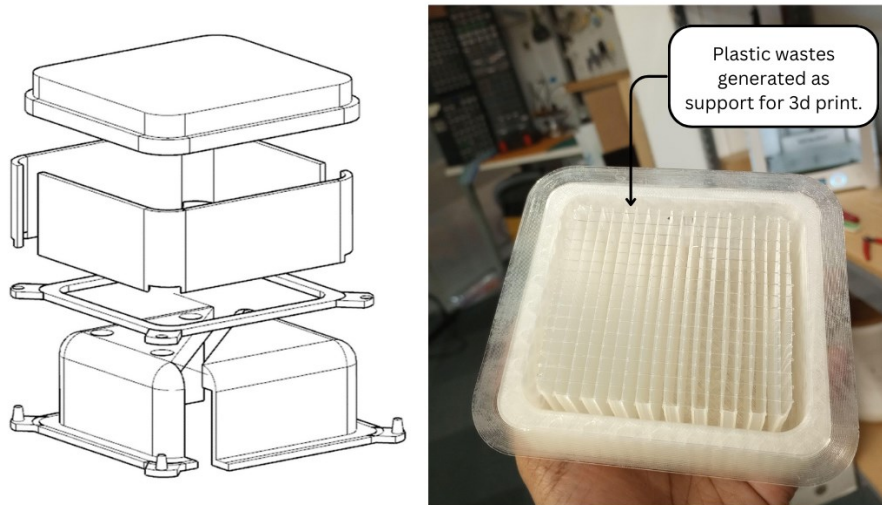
Isometric exploded drawing of how the mold parts are assembled (left); 3d supports generated on the other side to achieve smoother casting surface (right)
